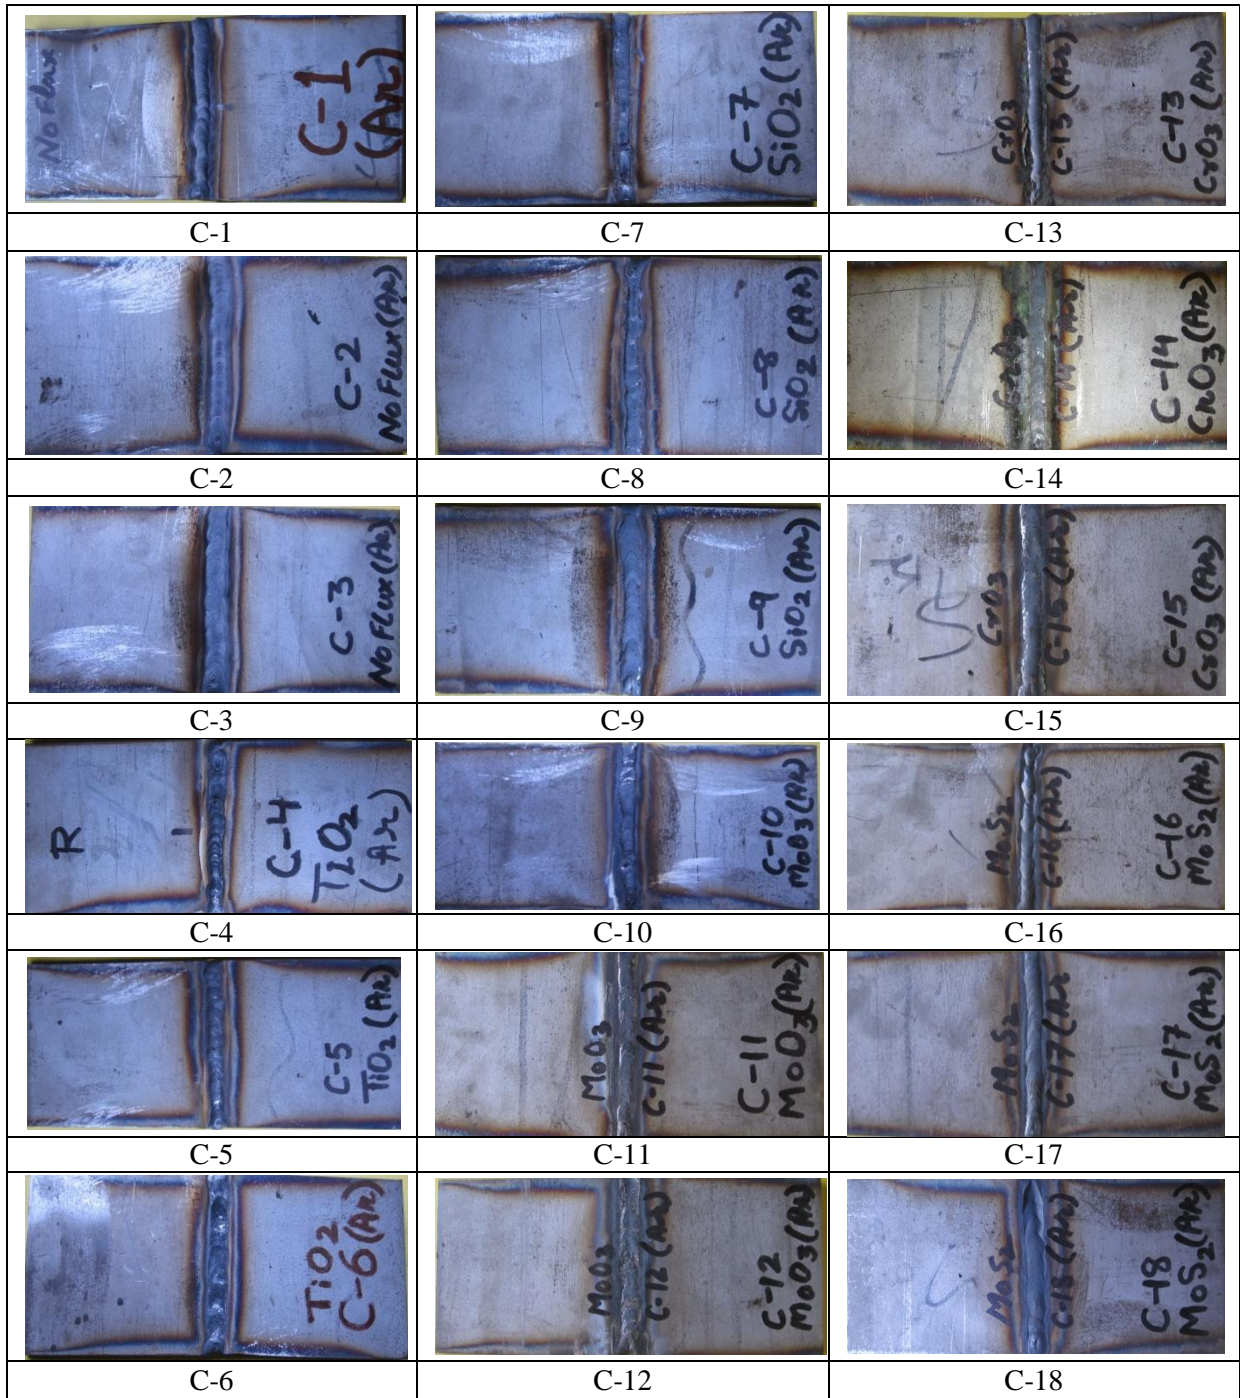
Macrograph showing the weld bead appearance of A-TIG welding of AISI 304 Under Ar shielding
